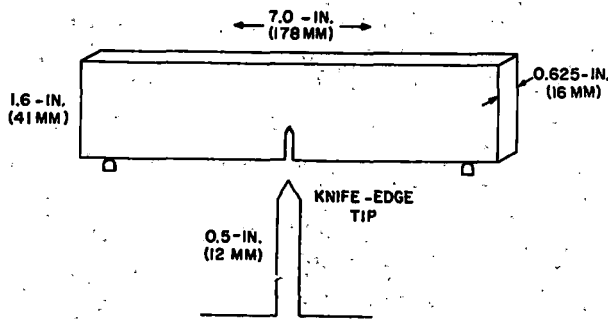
STANDARD (ASTM) DT TEST SPECIMEN
